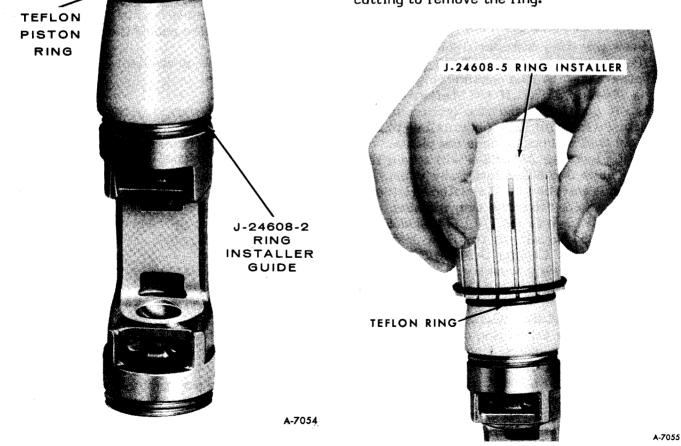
Teflon Piston Ring Positioned On Ring Installer Guide
